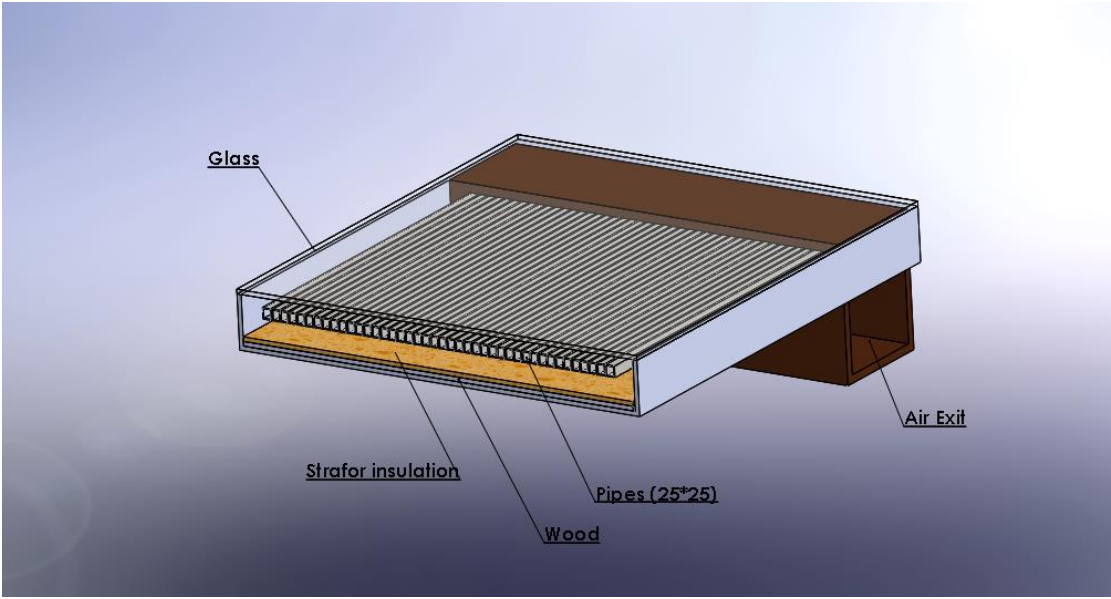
Sectional view of the (25 x 25 mm) Aluminum tubes.
